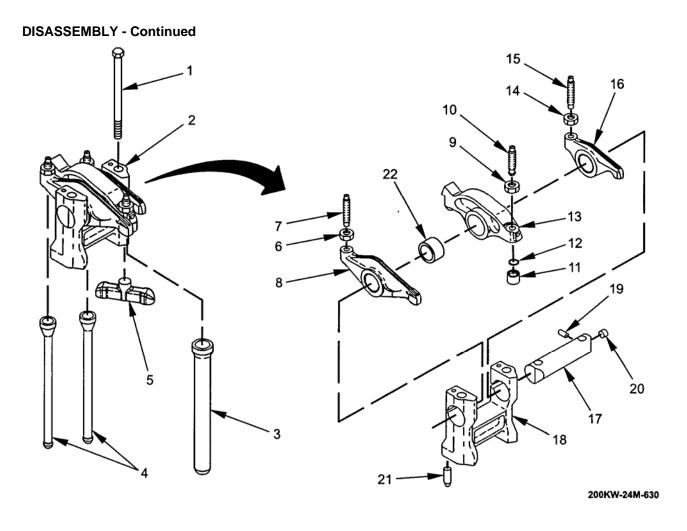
Rocker Shaft and Pushrod Removal and Installation.
